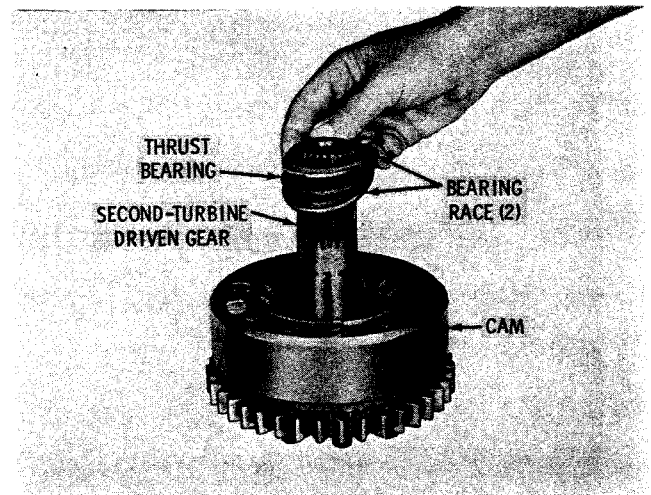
Installing thrust races and bearing onto second-turbine driven gear
